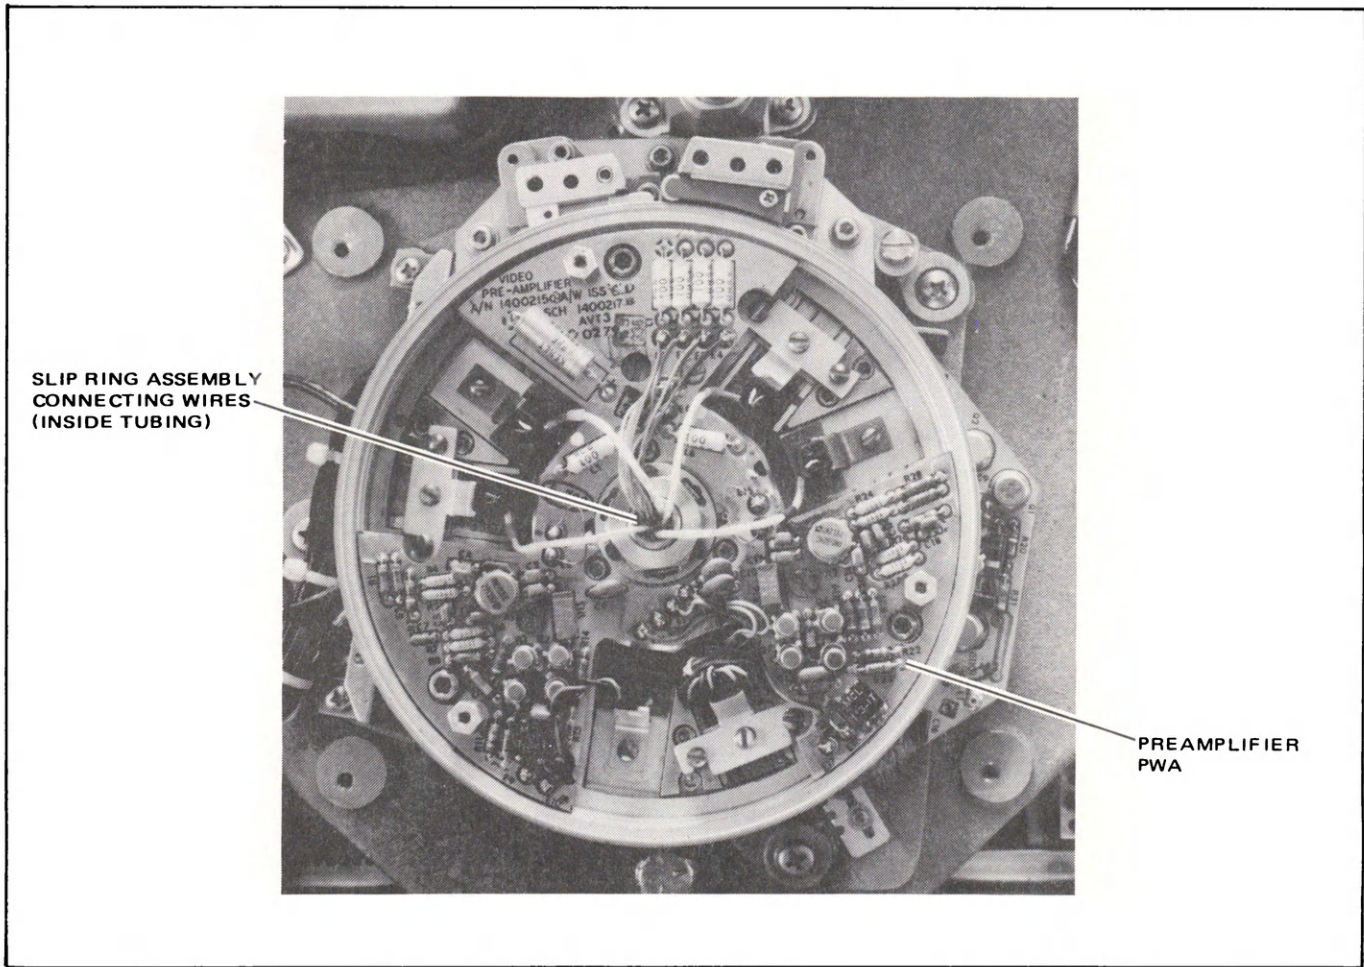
Scanner Assembly, Preamplifier PWA Removal
